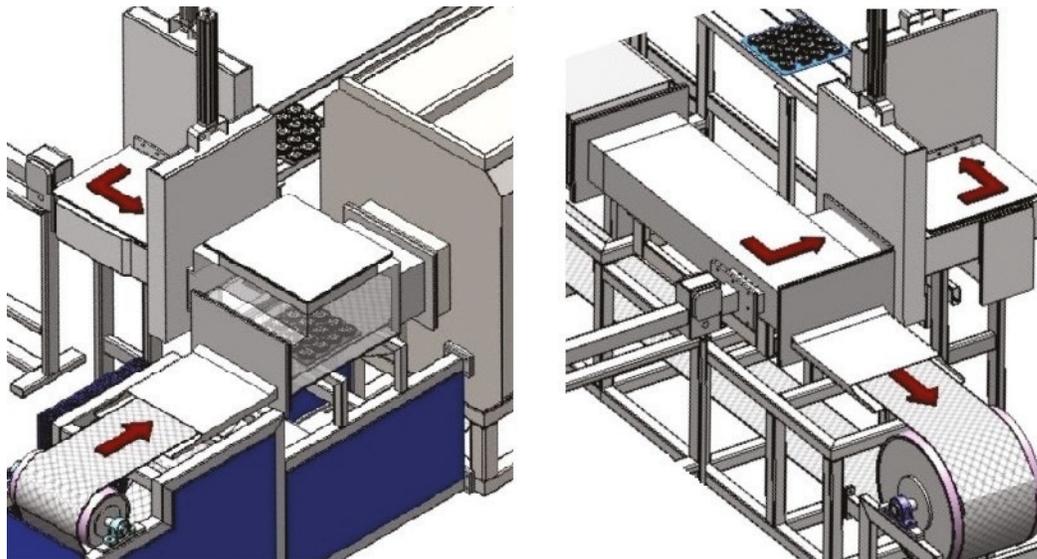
A conveyor belt loaded with parts passes into a mesh belt furnace (Courtesy Fluidtherm)
